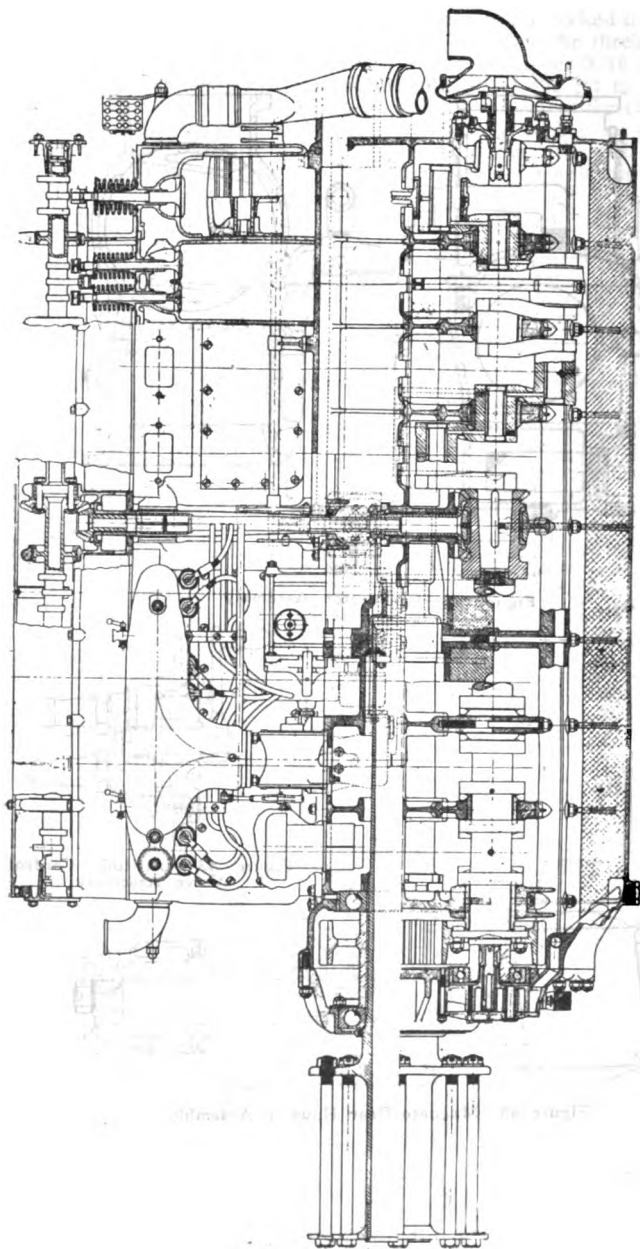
The 410 H.P. King-Bugatti engine—longitudinal section
